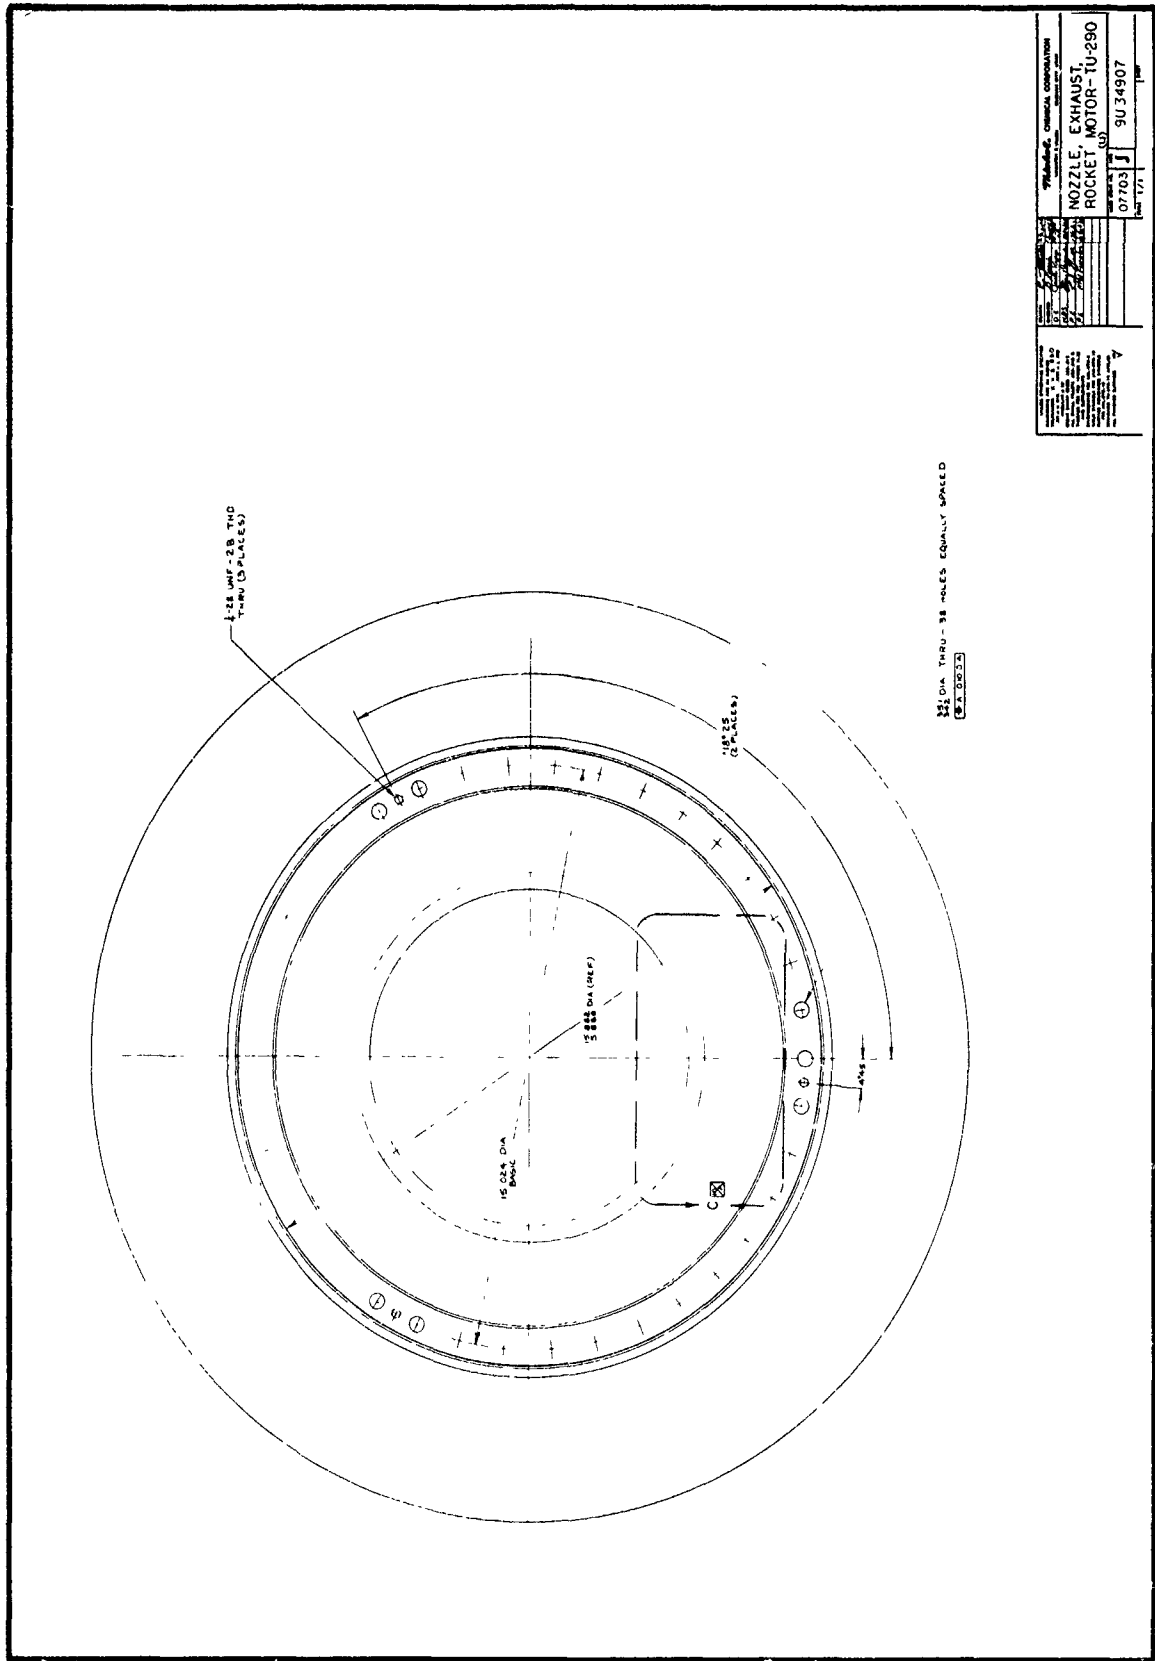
TU-290 Nozzle Design Drawing 9U34907A (Page 2 of 3)
